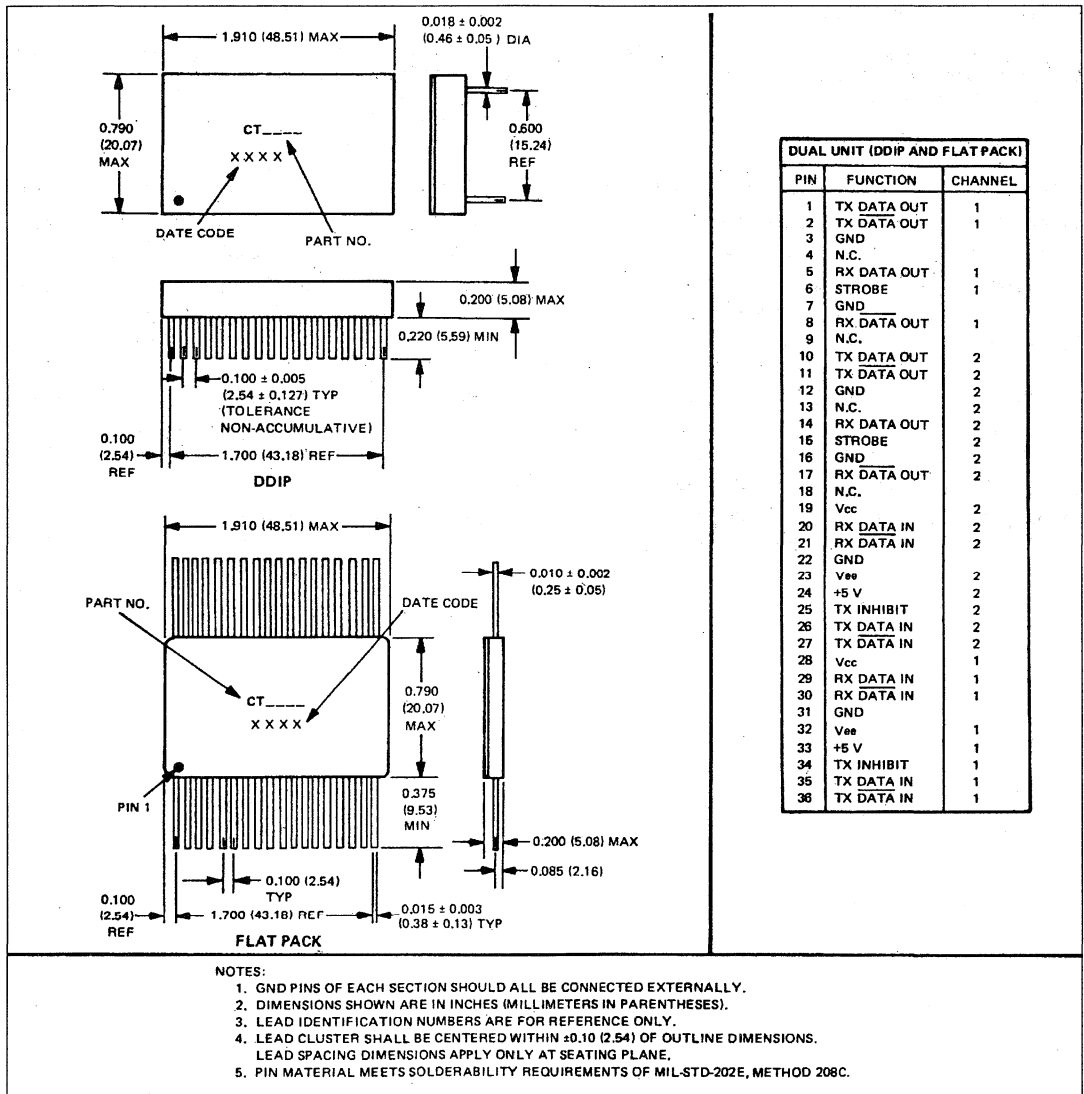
Mechanical Outline and Pinouts (Dual Unit)
